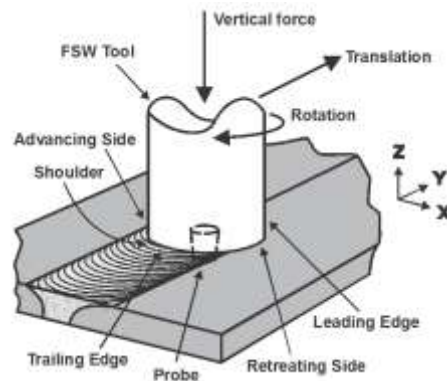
Schematic of FSW Process Courtesy University Of Wisconsin-Madison
